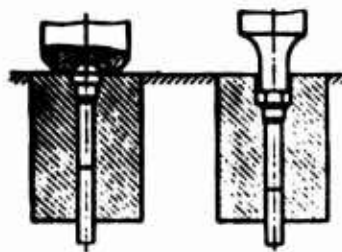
Upsetting of a hexahedral head on a two position single-strike automatic machine according to the method of the "Red Etna" plant.
